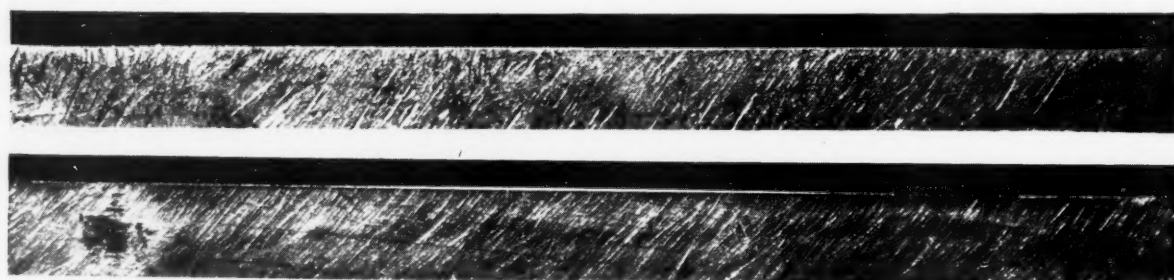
Inner Surfaces of Cutting Edges of Tensile Test Dies: (Top) Photograph of the Standard Die; (Bottom) Photograph of the Special Die
